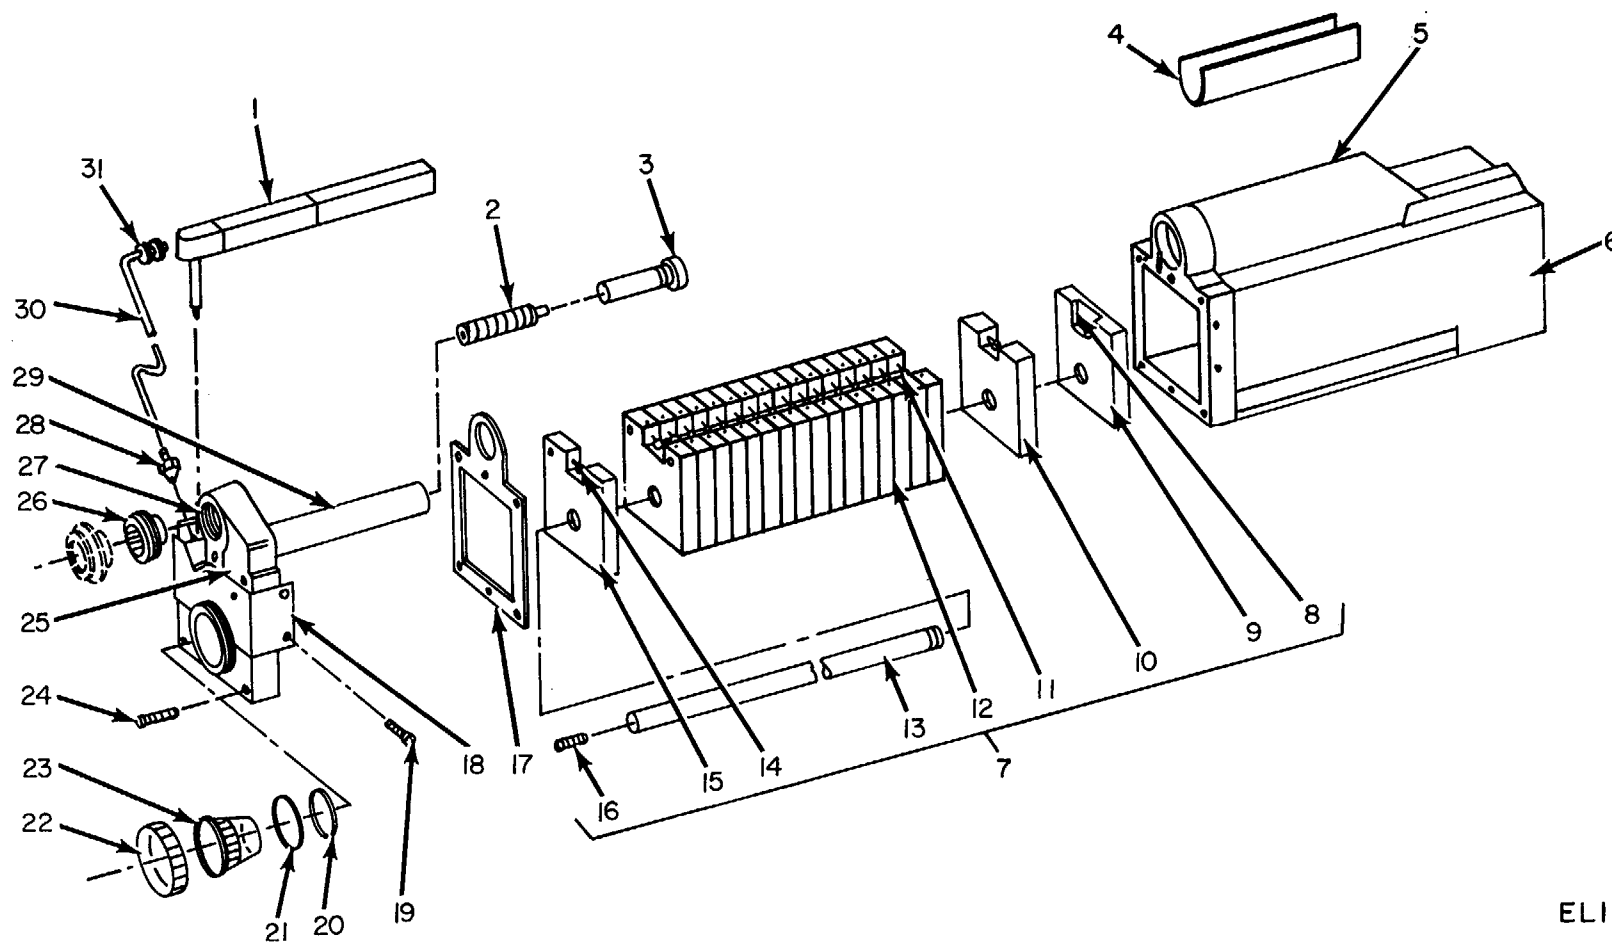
Generator Group OV-47/TAQ-2, Cable Assembly and Spare Parts.
